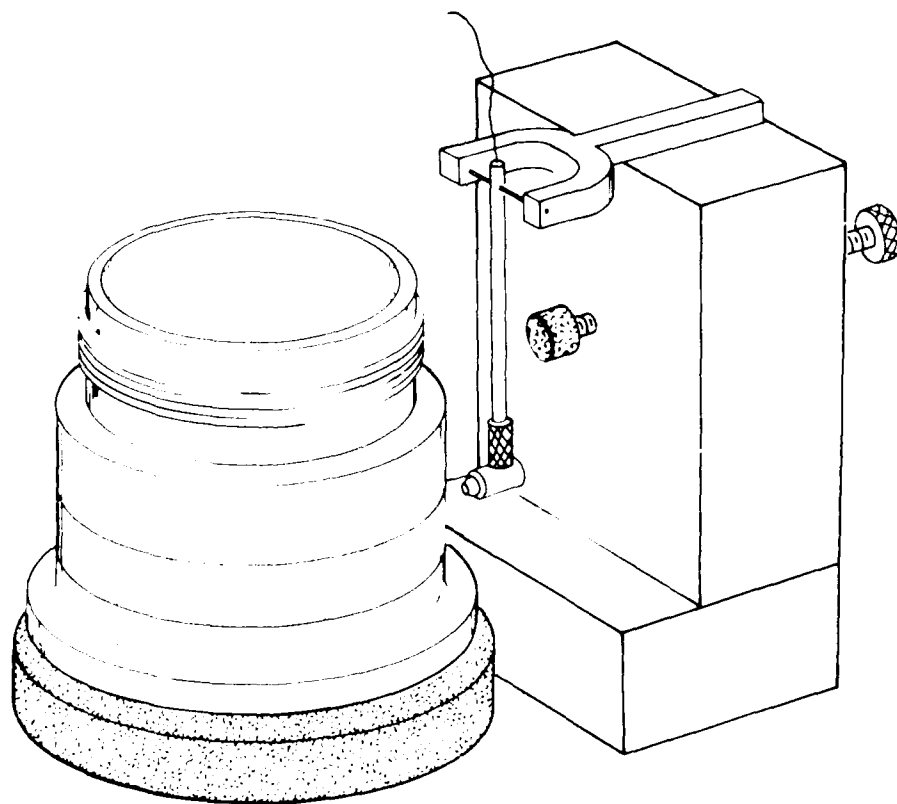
Sketch of test setup showing test fixture and part sitting on cork ring
